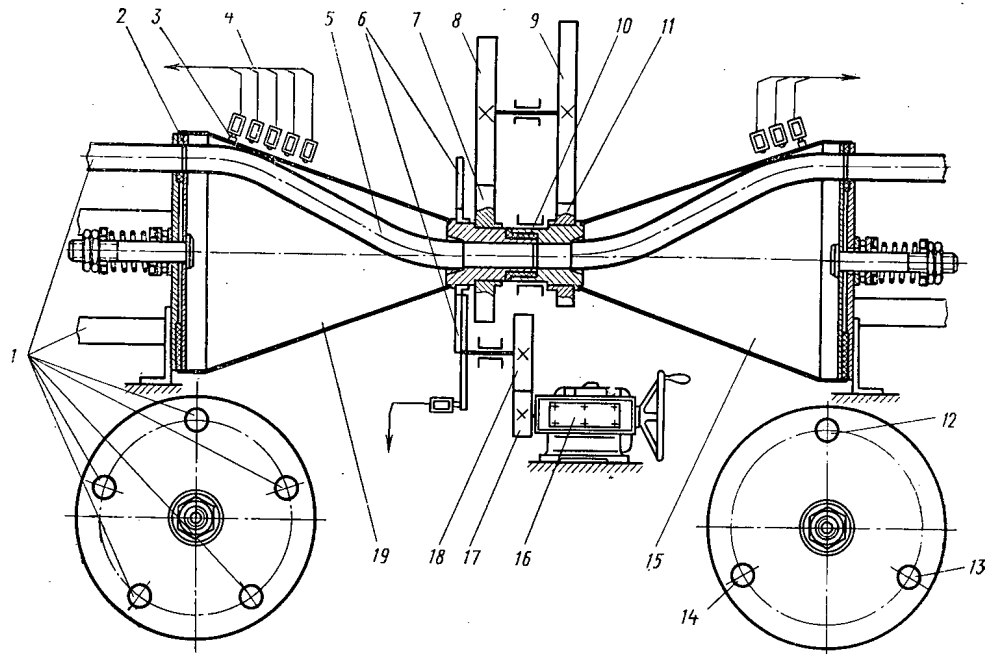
Distributor: 1) container duct to channels; 2) gasket; 3) hood; 4) electrical microswitches; 5) combination channel; 6) five-groove Maltese cross; 7, 9, 17) gears; 8, 11, 18) driven gears; 10) insert; 12) loading line; 13) radio-chemical laboratory line; 14) operational hot cave line; 15) half-body of container duct; 16) electric power drive; 19) channel half-body.
